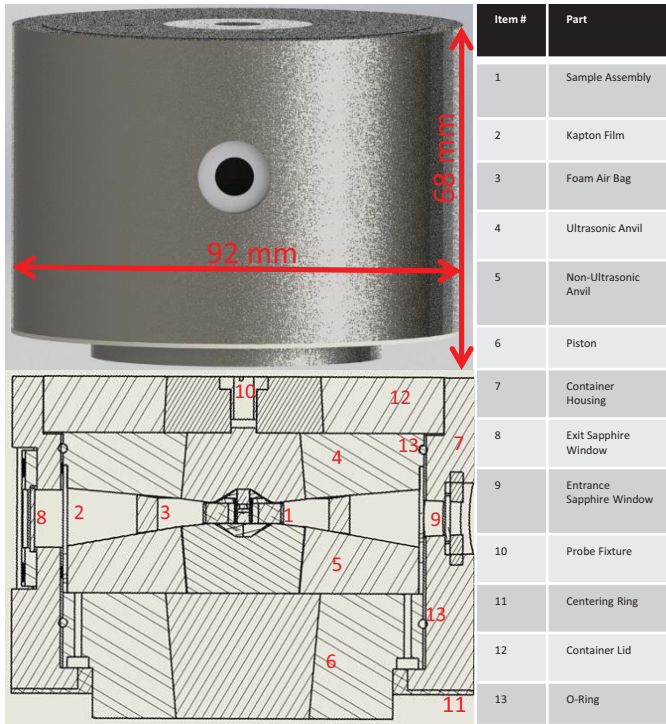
The containment vessel is, overall, 92 mm in diameter and 68 mm in height, when fully assembled. The entire fixture is comprised of 13 elements, delineated in the table on the right and indicated in the section view at the bottom left. The functions of each part are described in the text. (Color online.)
